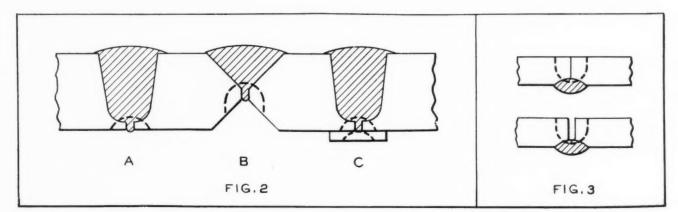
(A) Removal of Initial Weld Root in U-groove Weld; (B) Removal of Weld Root in Double-vee Weld; (C) Removal of Backing-up Strip Used to Aid Initial Penetration. Fig. 3. Preparing Two Butted Plates for Welding. Gouging Forms Clean U-groove for Welding with Backing-up Bead in Place
